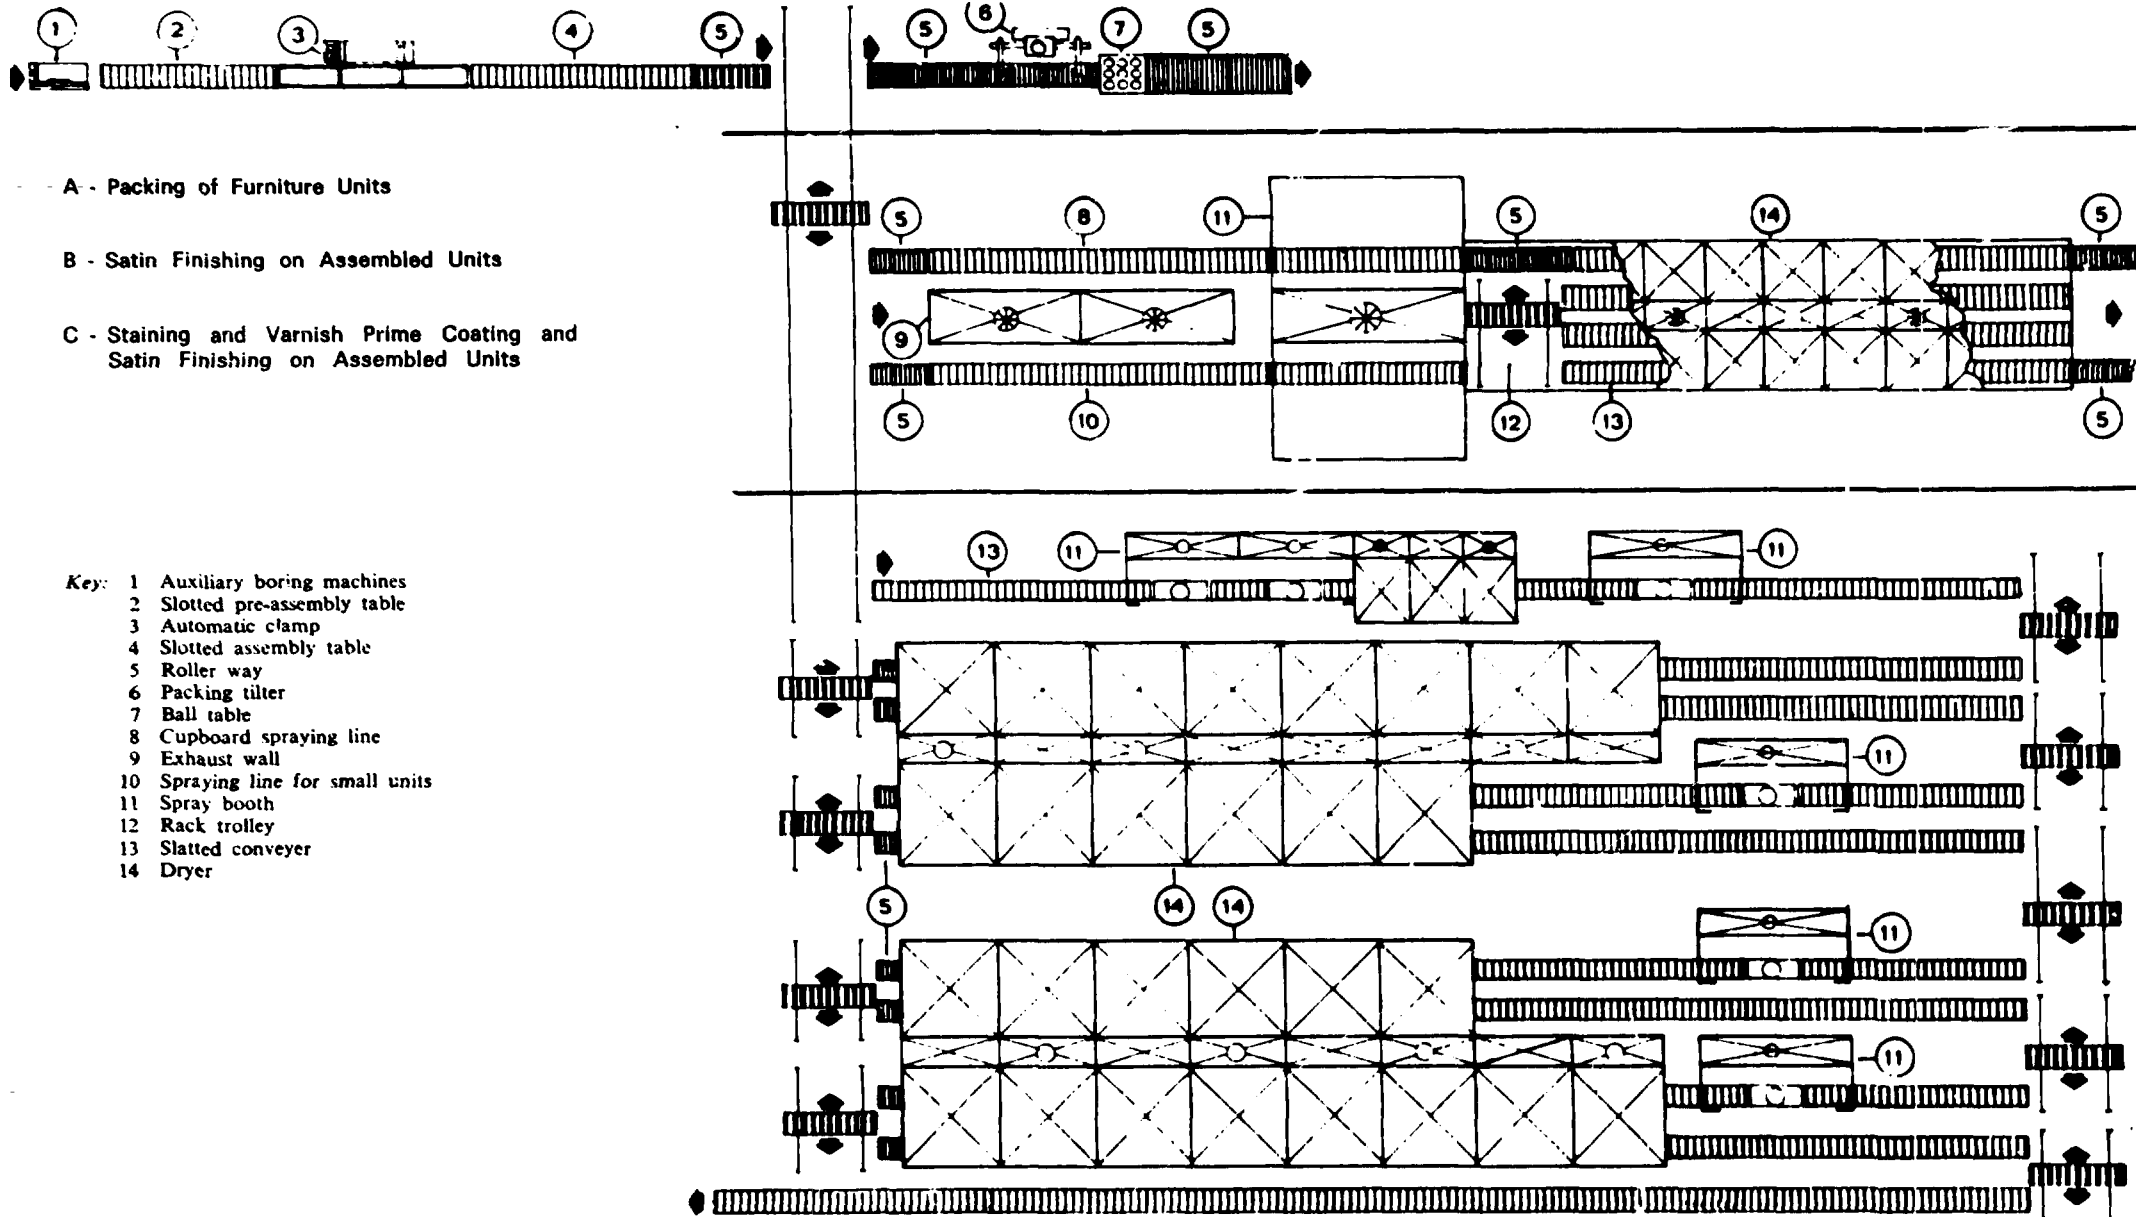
Layout for assembly and packing (furniture units with finished panels)
